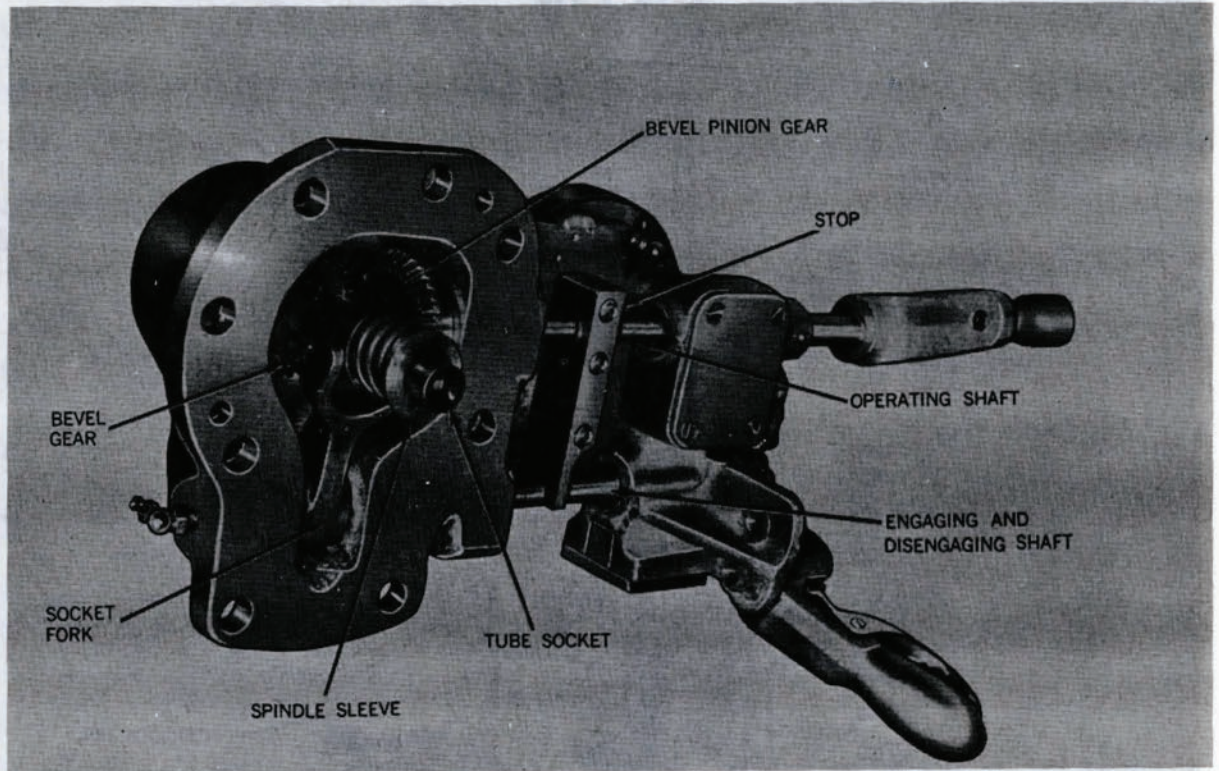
Circle and Depth Setting Mechanism, Lower Left-Hand Tubes, Spindle OUT, Detent Plunger Engaged.
